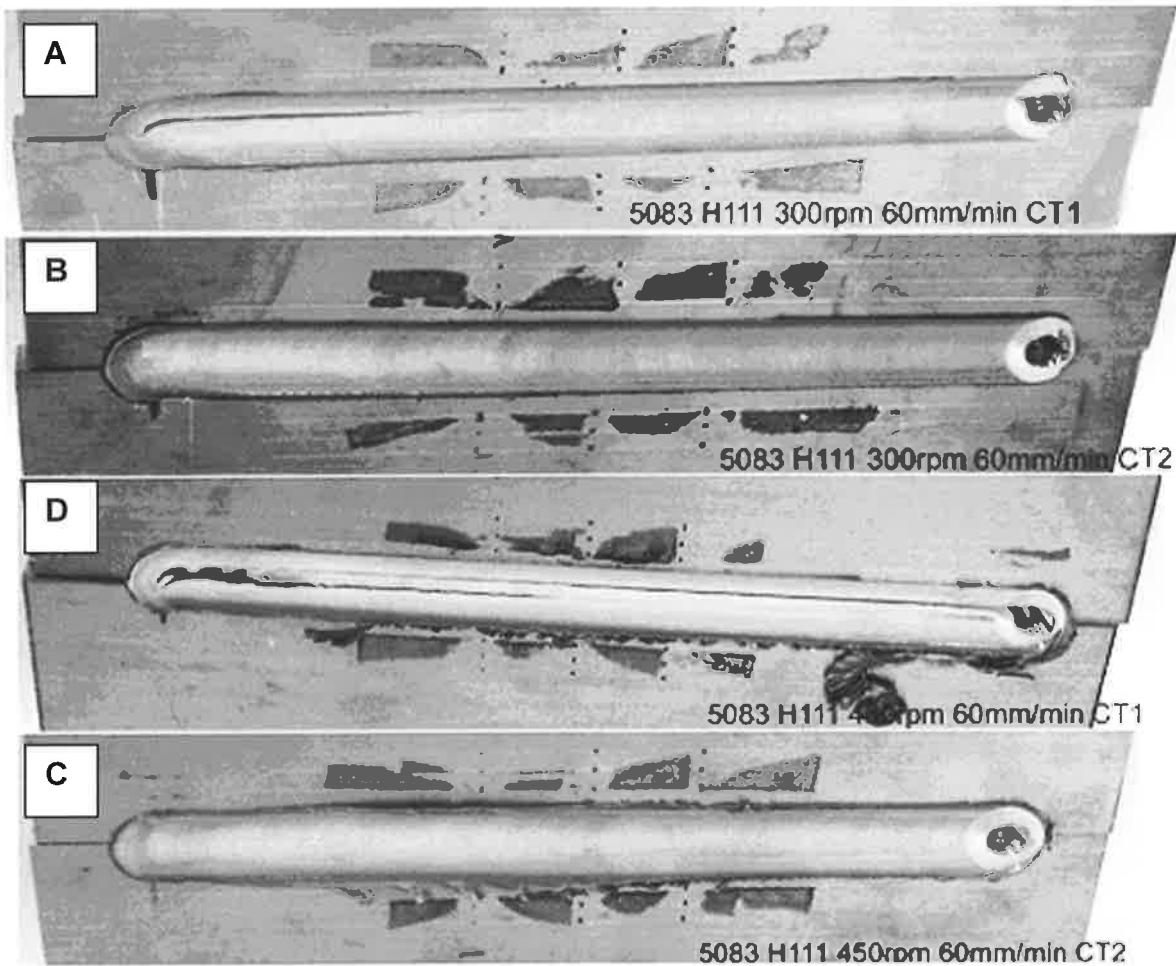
Welds produced in AA5083 H111 from top to bottom 405A, B, D and C. Note welds 405A and D were produced using tool pin CT1-14 and suffer from an open running void.
